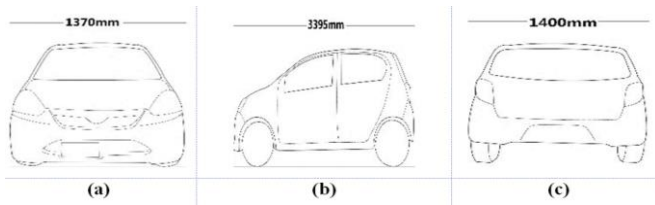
Blueprints of Daihatsu Mira X (a) Front view (b) Side view (c) Back view
